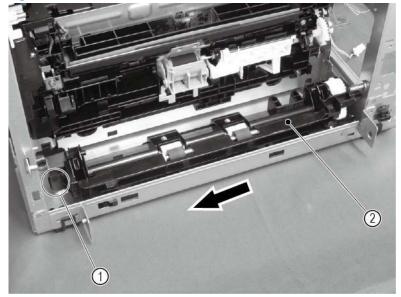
Release one tab and slide and remove the feed frame assembly
